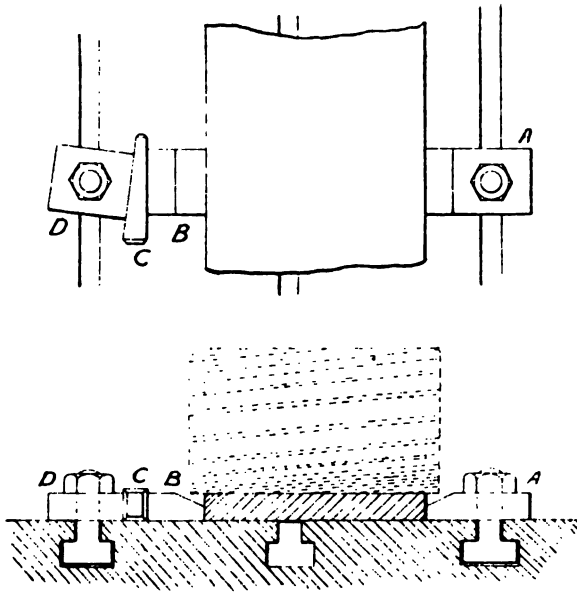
Edge Mill working on Thin Piece held with Side Strips wedged against Blocks Bolted in the Slots.
